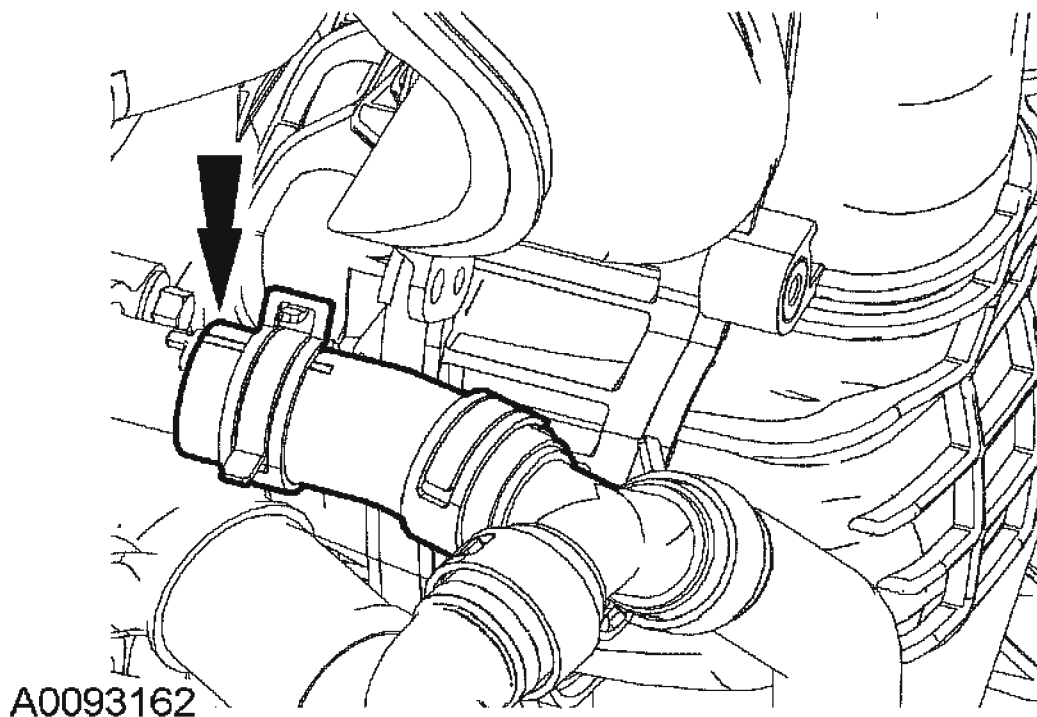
Disconnecting Heater Hose From Thermostat Housing
